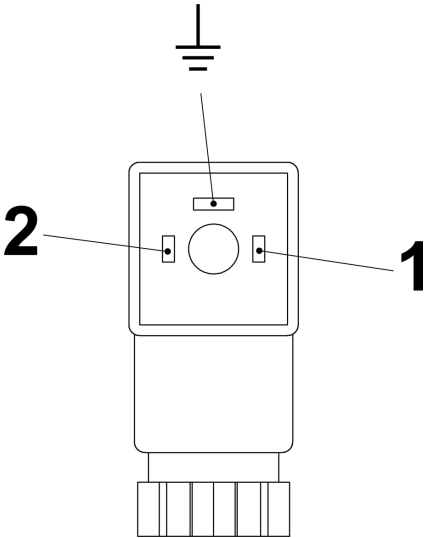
Pin assignment, plug socket, normally-open contact (Form 15x50)
